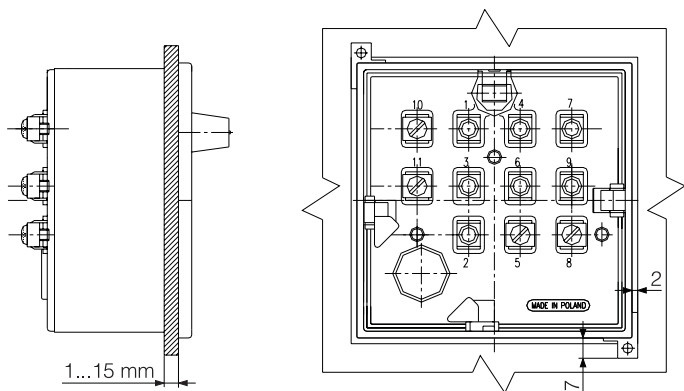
Way of the EP29 voltmeter assembly on the panel.
